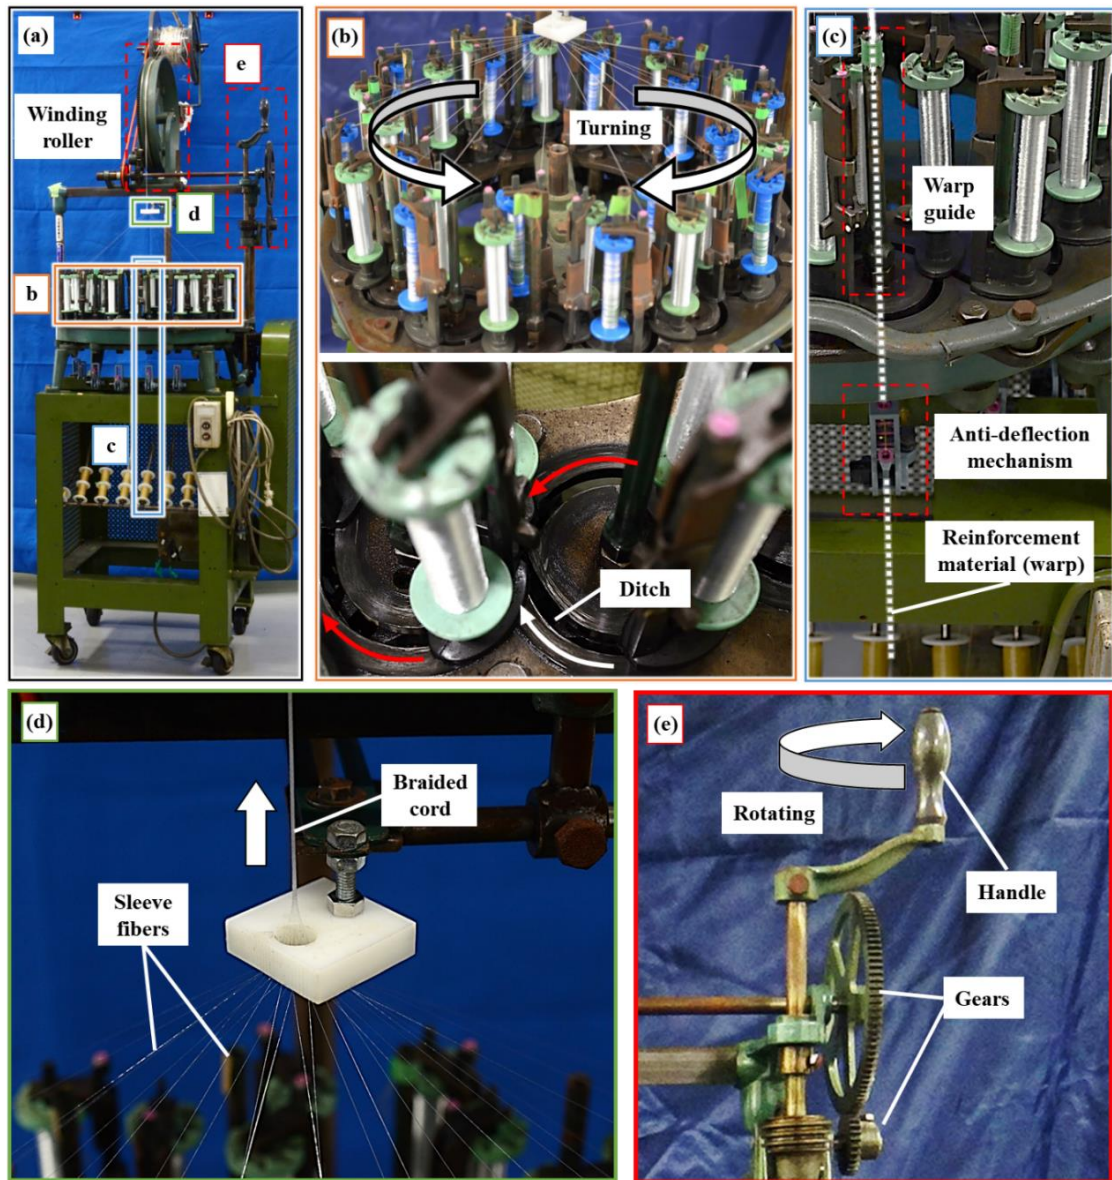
Structure and Drive Mechanism of the braiding Machine
